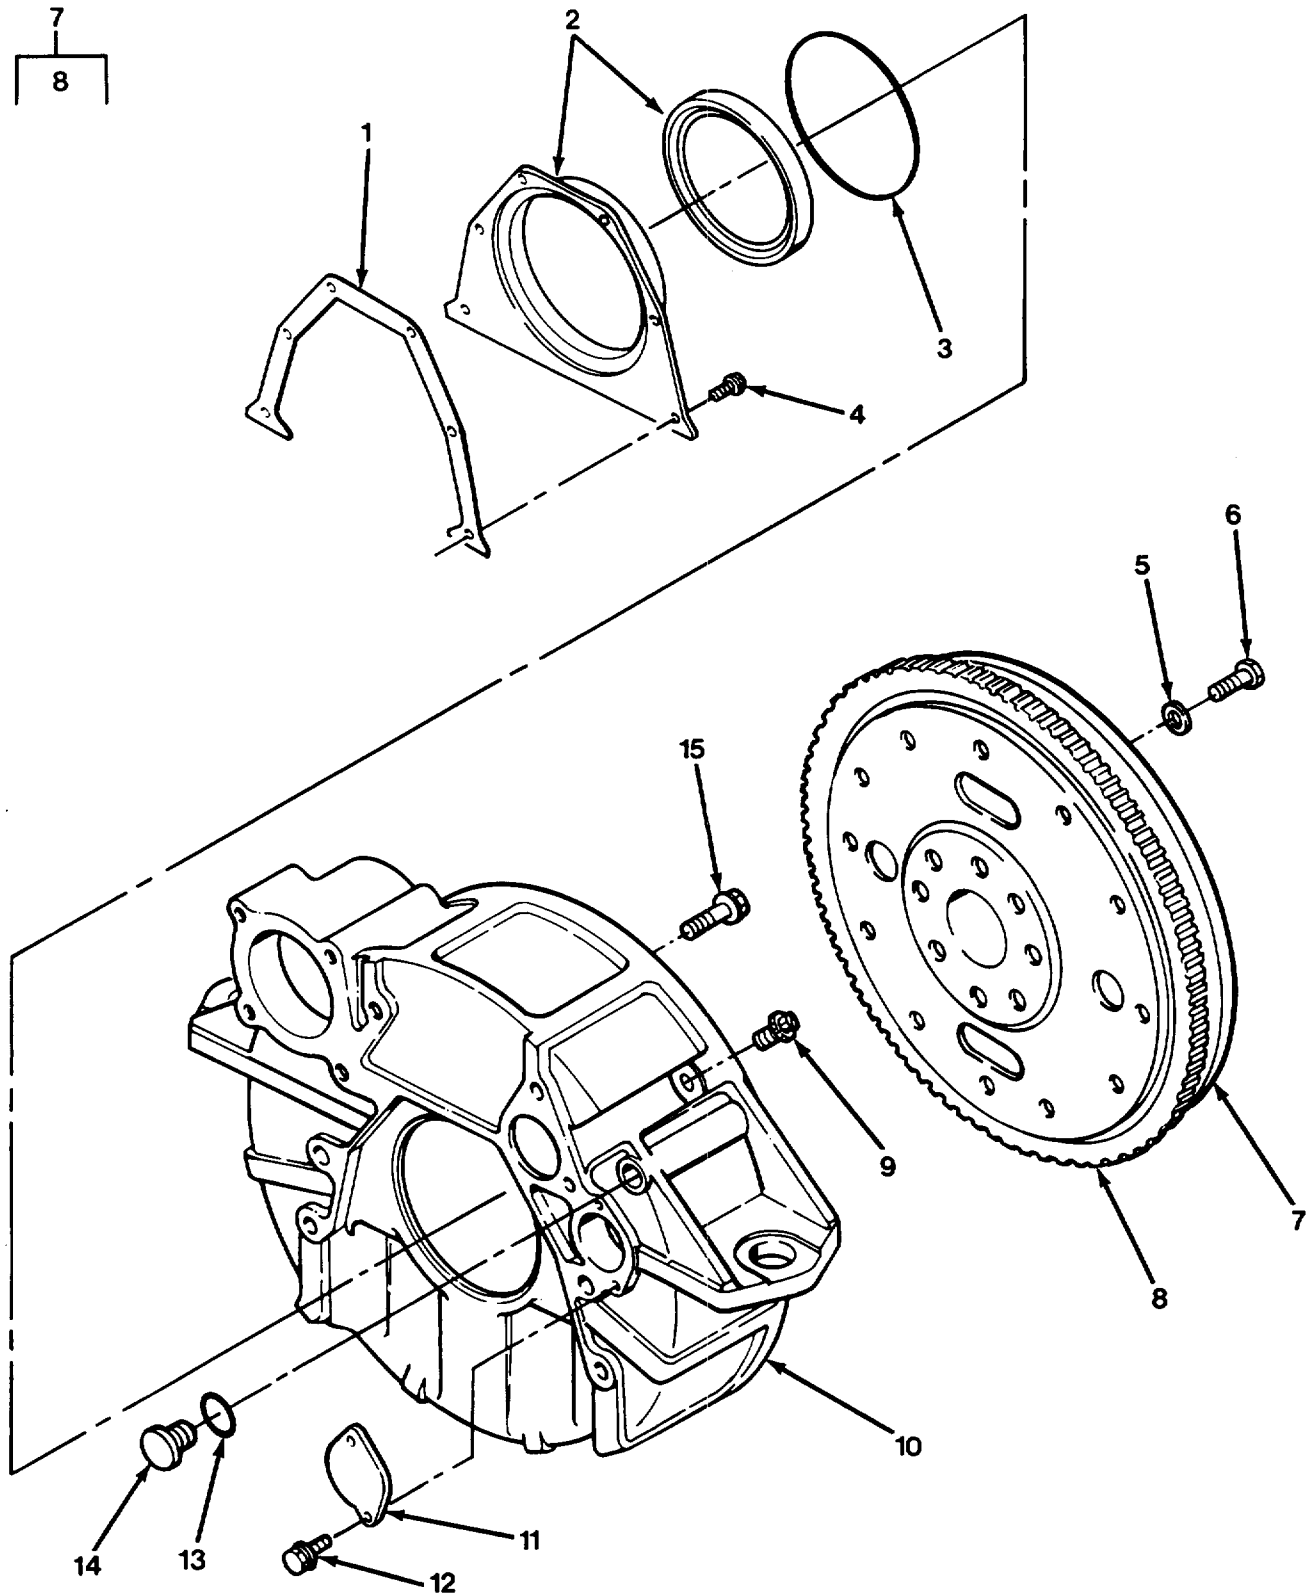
FLYWHEEL ASSEMBLY AND FLYWHEEL HOUSING
